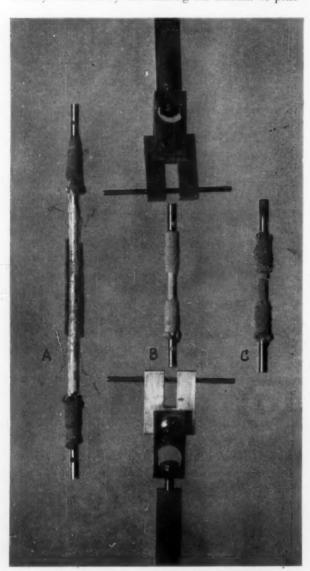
"Cold-welded" tubular specimens for tensile test.
